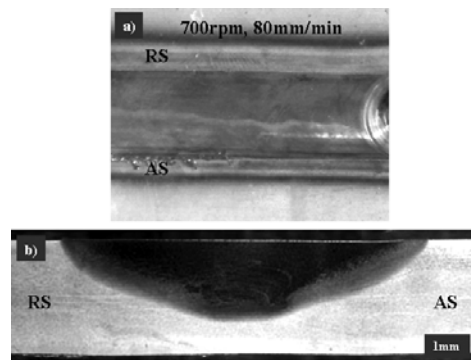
Surface appearance of SK5 steel FSW joint(a) and cross section perpendicular to the welding direction(b)
